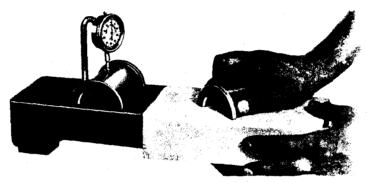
Reducing Edges of Crankshaft Main Bearing
